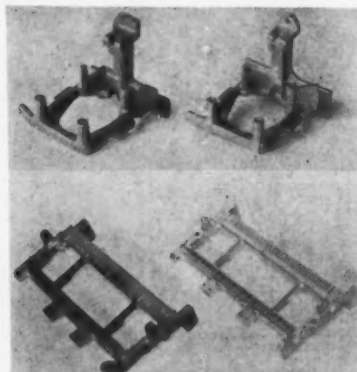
Permanent mold castings on left replaced by die castings at lower cost.
